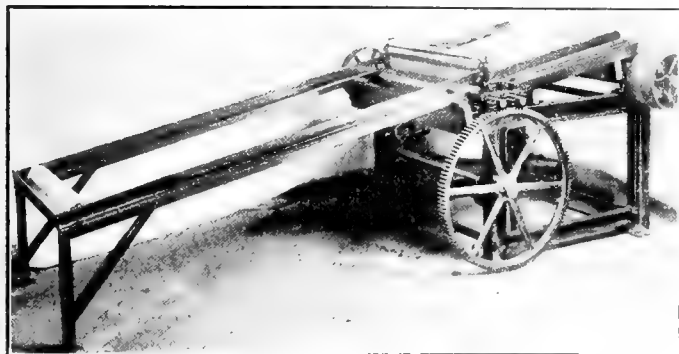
AUTOMATIC TRIMMING AND WRAPPING MACHINE.
